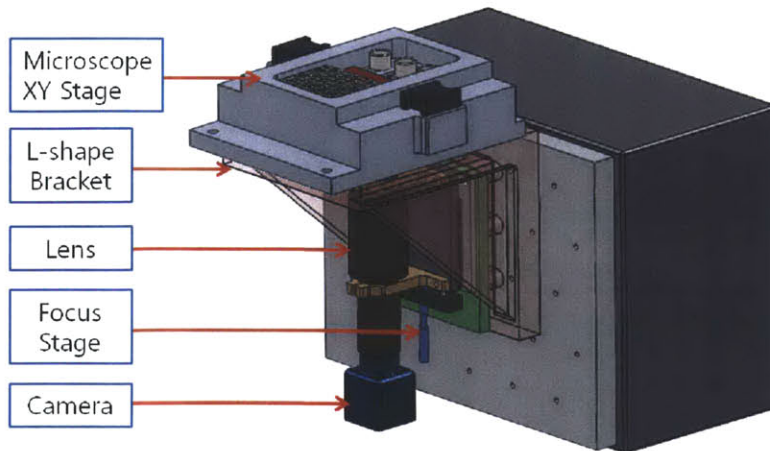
Assembled CAD model for the self-designed inverse microscope.
